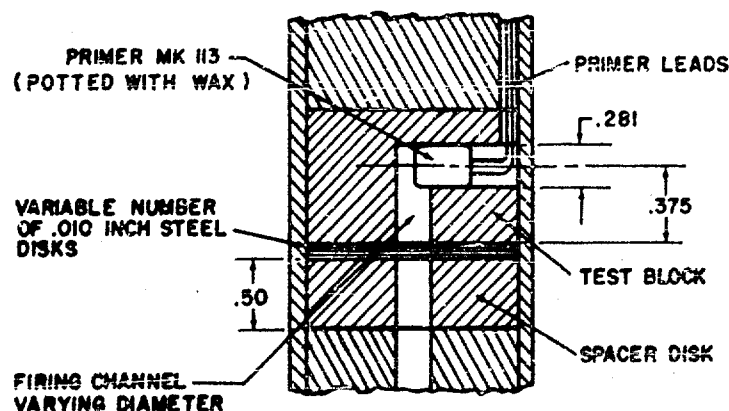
Test Fixture Assembly for Determining Optimum Firing Channel Diameter for Primer Mk 113.
